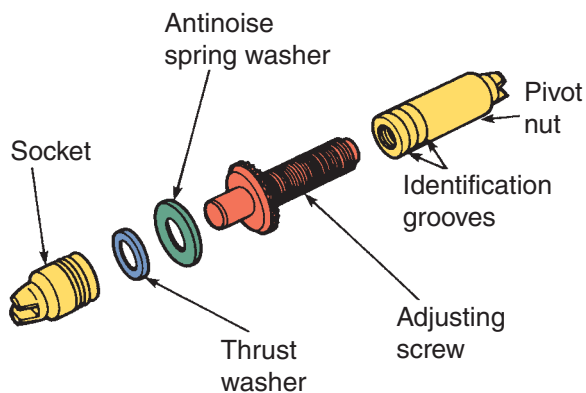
An exploded view of a brake adjuster assembly.
